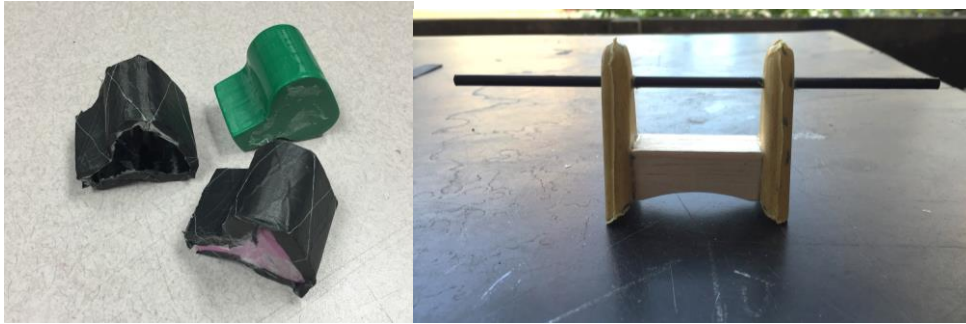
3 Manufacturing Landing Gear Nose (Left), Production Landing Gear (Right)
